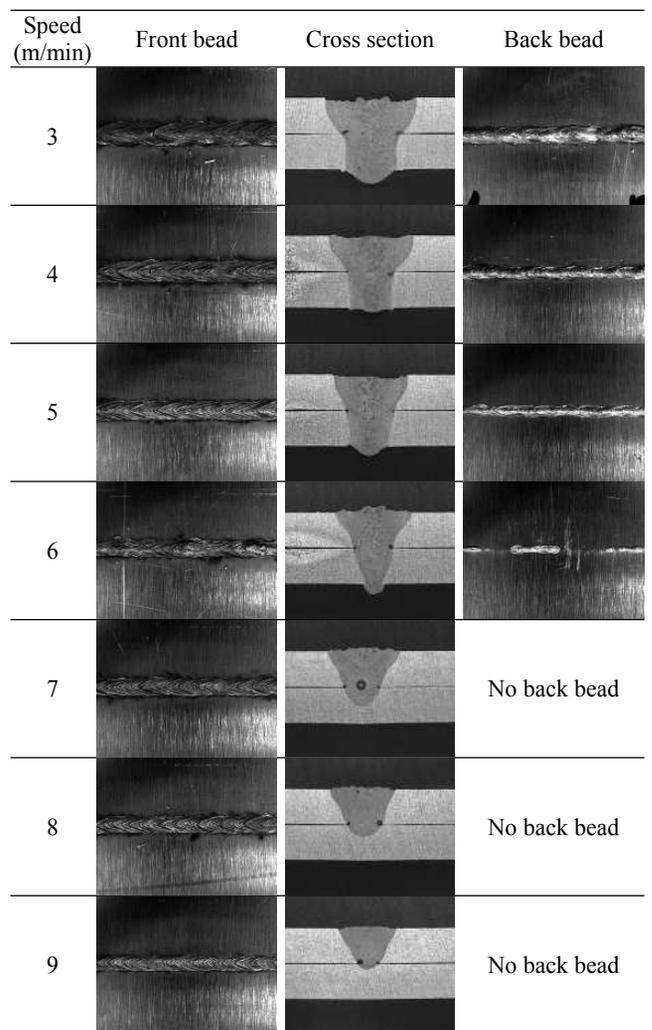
Bead shapes for various welding speed (laser power: 3 kW, focal position: 6 m)
